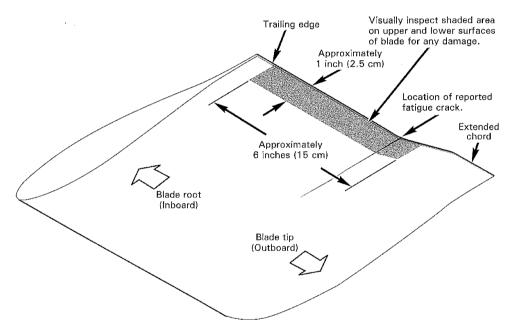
Section of MRB P/N C016-7 (View of blade lower surface)
